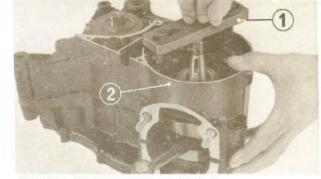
(1) Crankcase disassembly tool (2) Left crankcase
